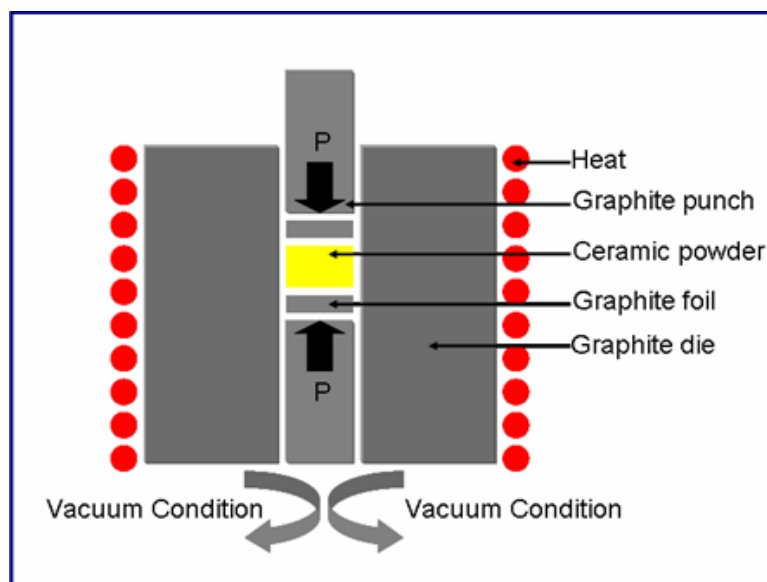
Schematic view of the vacuum hot pressing furnace configuration.
